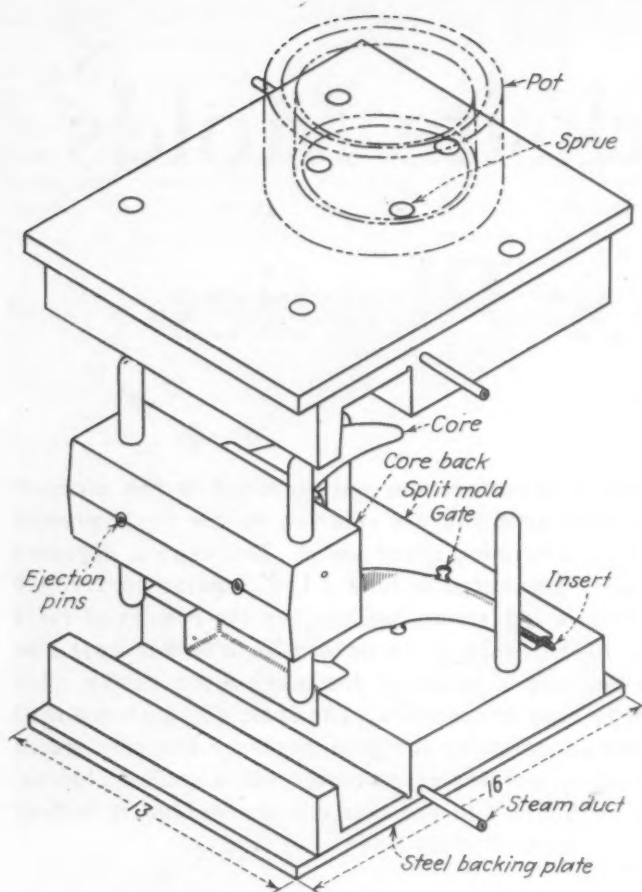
Exploded view of the Kirksite Transfer mold for the hook antenna mast.
